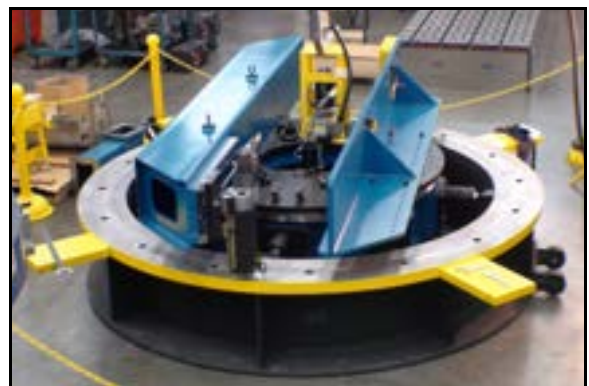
HORIZONTALLY MOUNTED MACHINE
